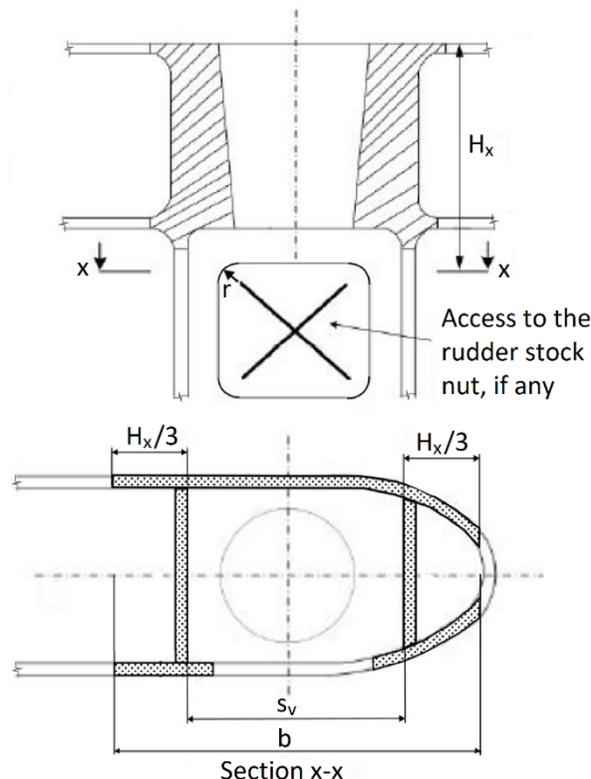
Cross-section of the connection between rudder blade structure and rudder stock housing, example with opening in only one side shown
